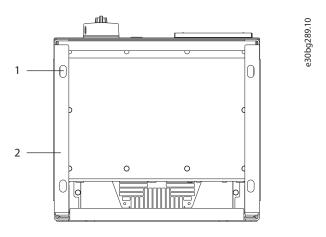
Pedestal Installation in D7h/D8h Drives
